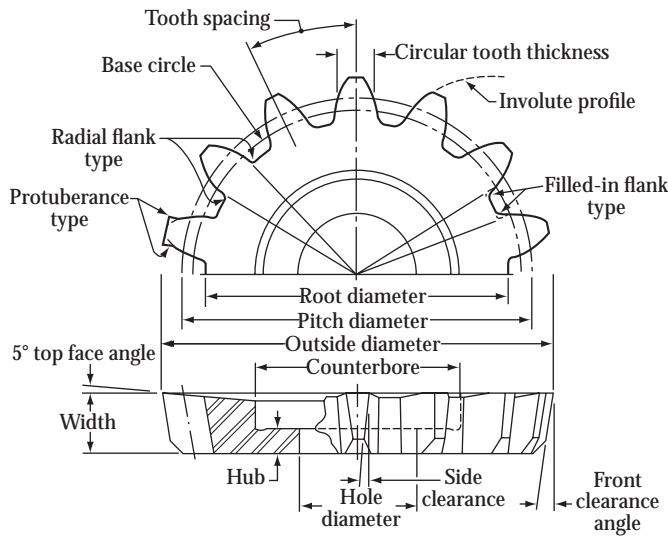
Design details of disk shaper-cutter. (Courtesy of Illinois Tool Works, Chicago, Illinois.)
